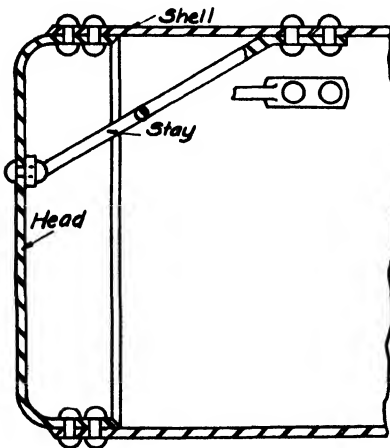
Pressure Vessel with Stayed Flat Head.
